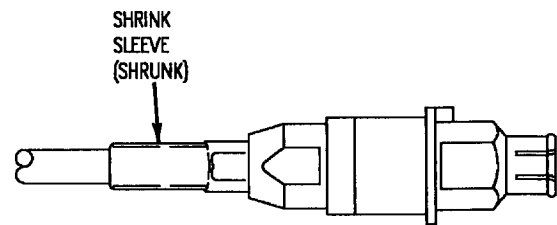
885-213-001 Twinax Assembly Procedure (Sheet 3)
